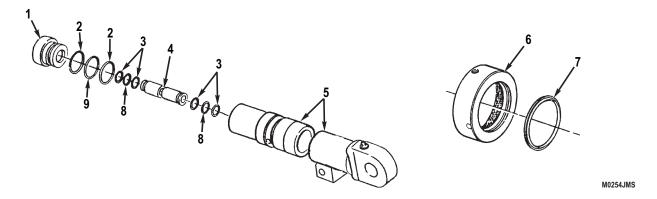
Hydraulic Lift Cylinder (with Side Lift Kit) Assembly.
